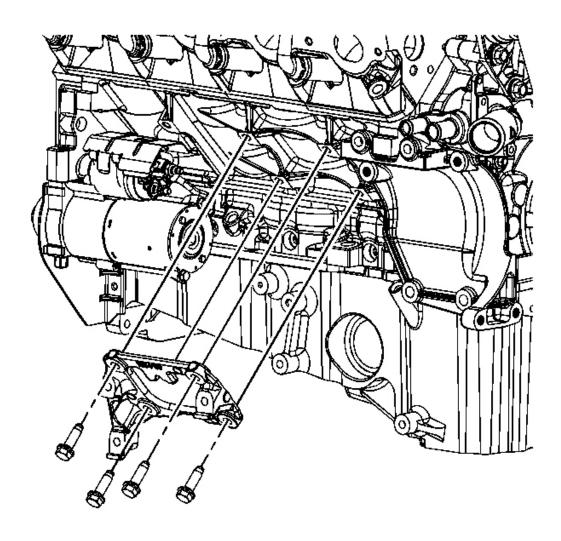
Removing/Installing Engine Mounting Bracket Courtesy of GENERAL MOTORS CORP.
